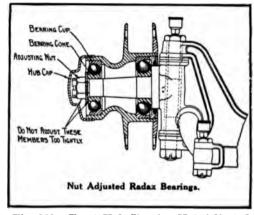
Front Hub Showing Nut Adjusted Cup and Cone Type Ball Bearing.
